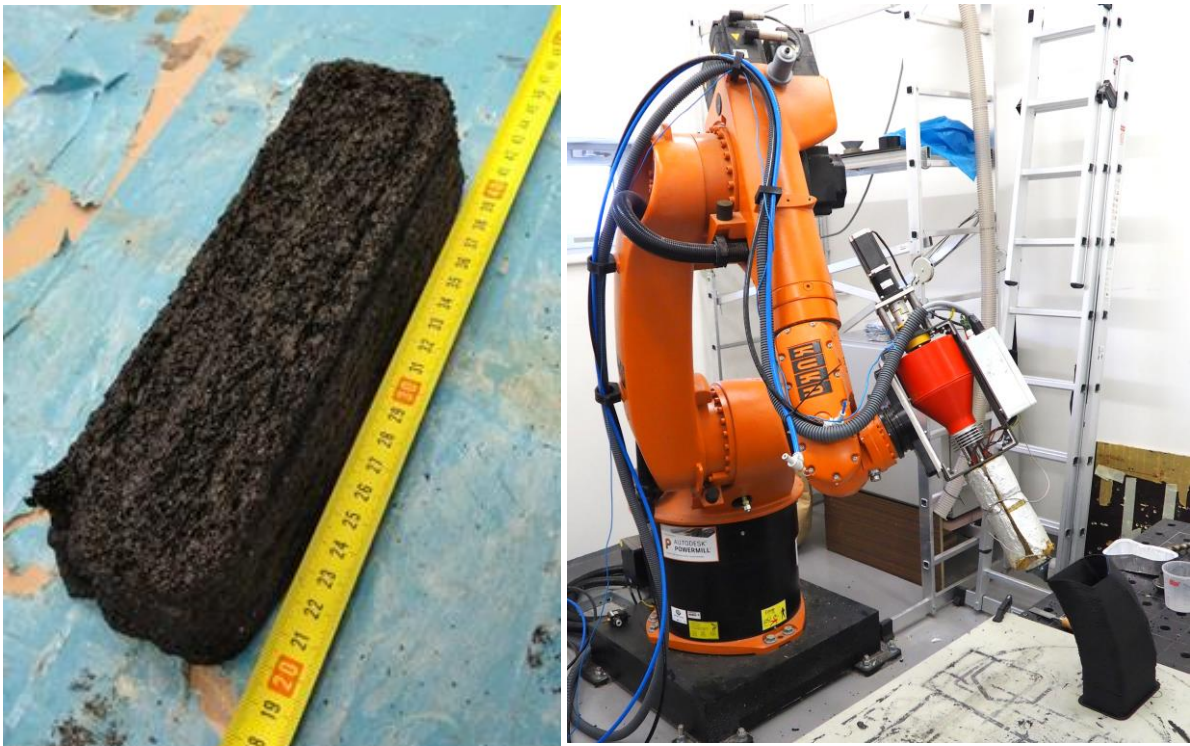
Left: Flexural sample in the printed state, Right: The robotic assembly during a print
